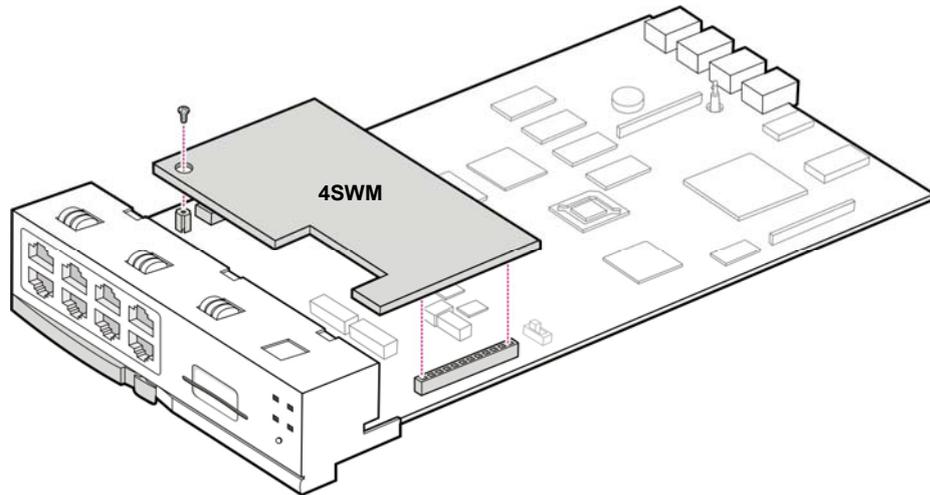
Mounting 4SWM/4DLM on MP10/10a/11 Board
